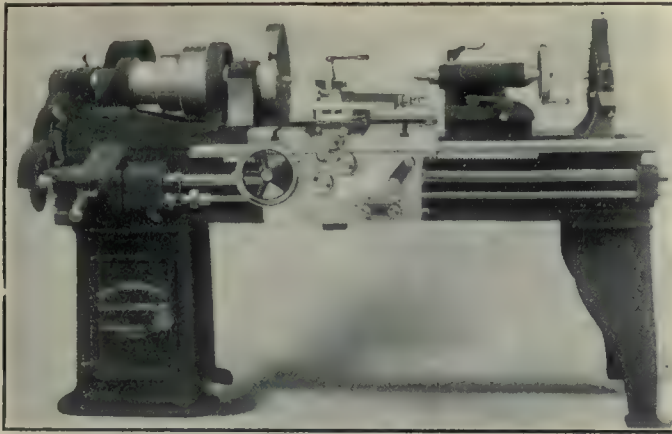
Cincinnati Lathe With Three-Step Cone.
